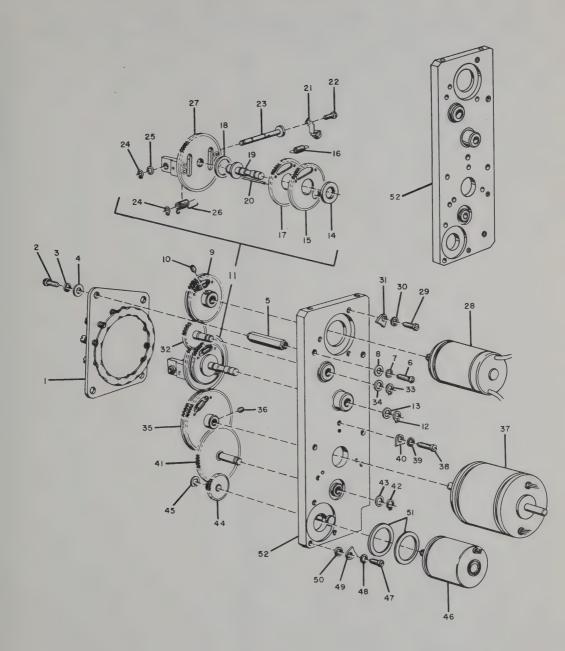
Receiver Accessory, Gearing Unit Assembly, Exploded View
